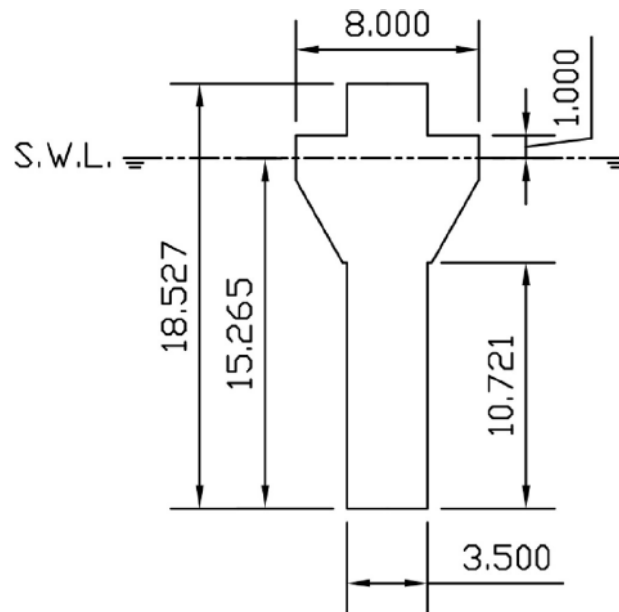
Profile view and geometrical dimensions of the WEC buoy in [m] (Yang et al., 2020)
